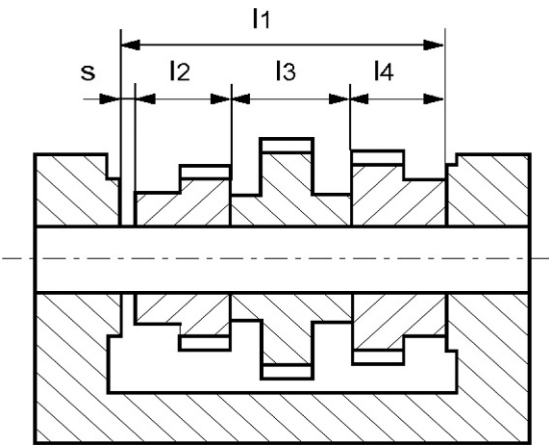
Assembly with required clearance s (functional closing tolerance T)
